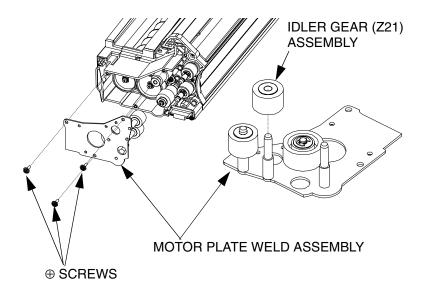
Removal of the Idler Gear (Z21) Assembly
